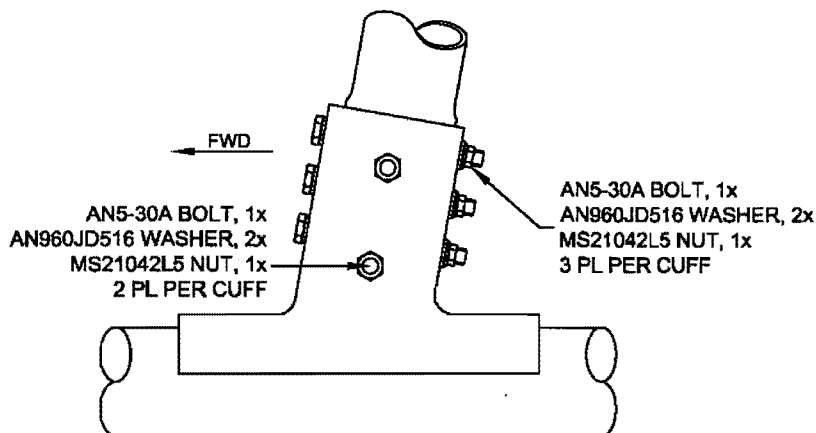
Installation for D206-667-201 aft crosstubes on thru bolt skid tubes
